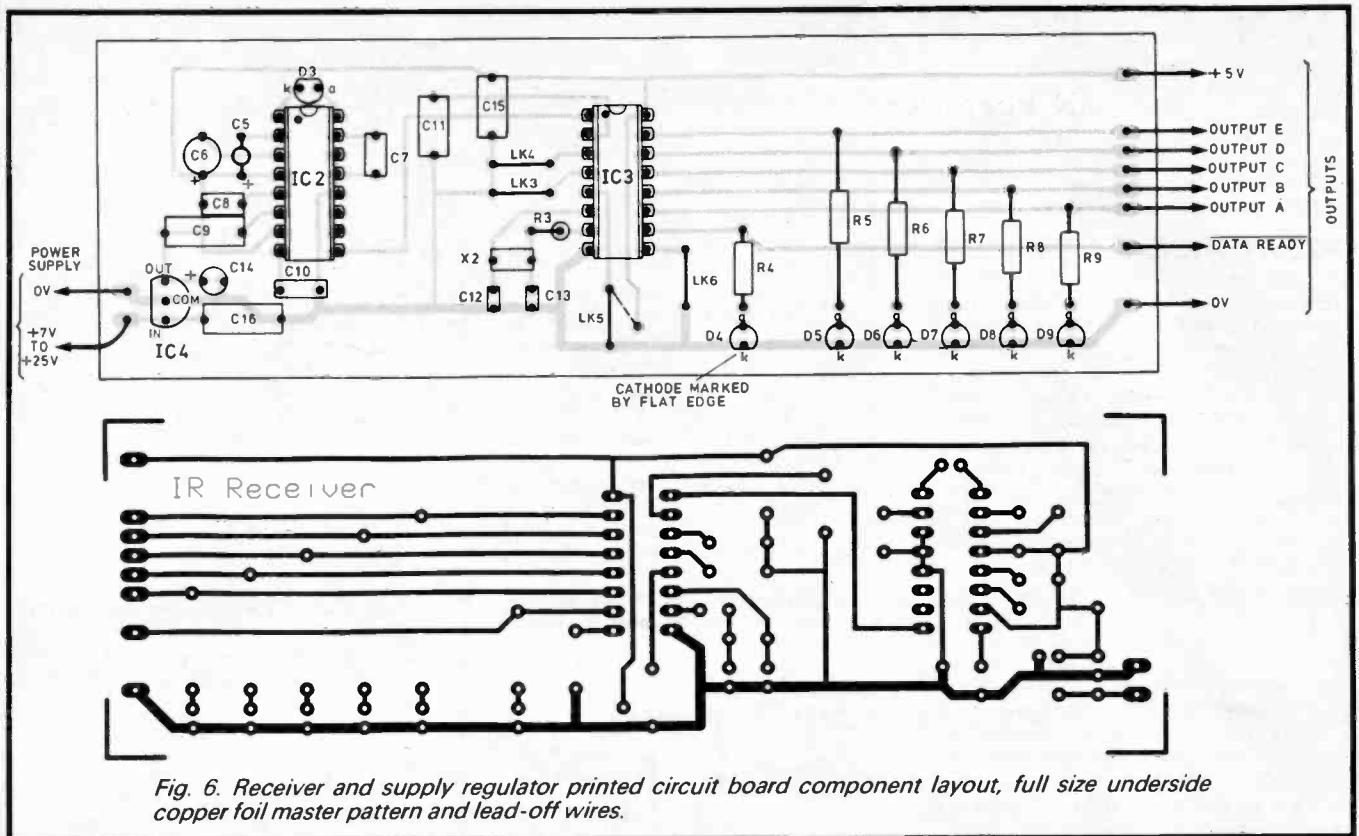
Receiver and supply regulator printed circuit board component layout, full size underside copper foil master pattern and lead-off wires.
